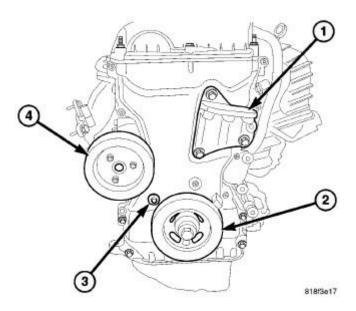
Removing/Installing Accessory Drive Belt Upper & Lower Idler Pulley Courtesy of CHRYSLER GROUP, LLC
